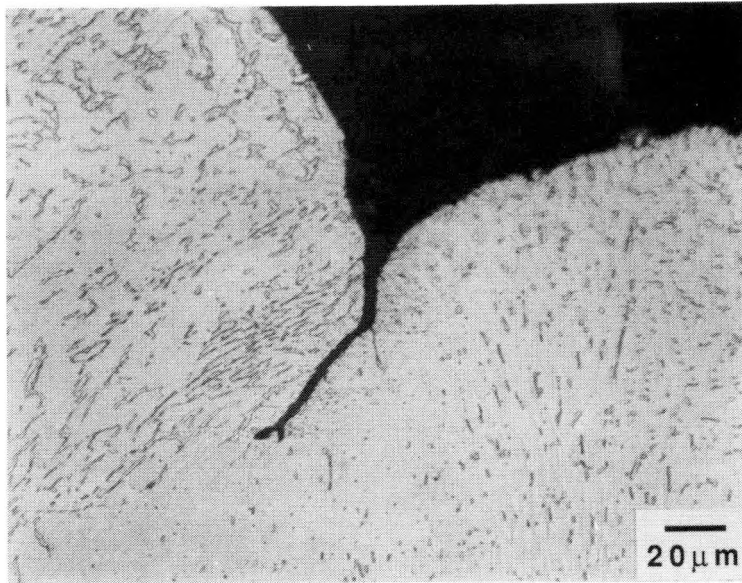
Cross Section of a Crack in the Weld Fusion Line of a 10-in.-diam Modified Type 347 SS Pipe Weldment at 433X Magnification.
